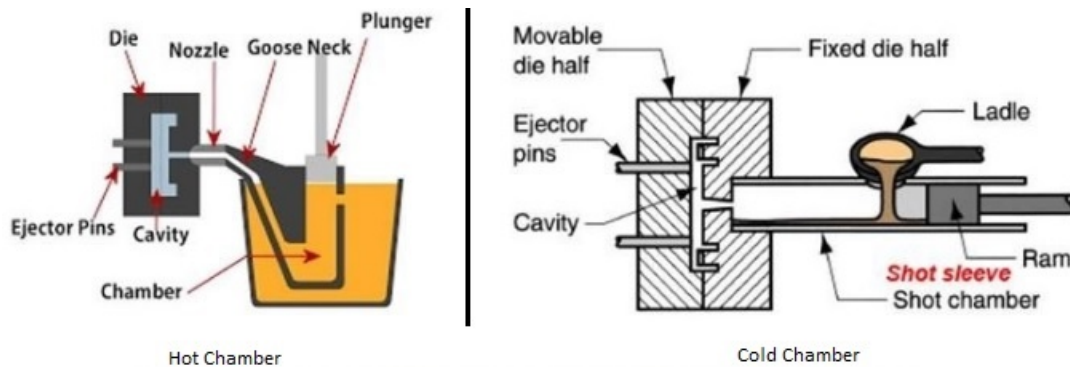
Hot/cold chamber die casting (adapted from [128])
